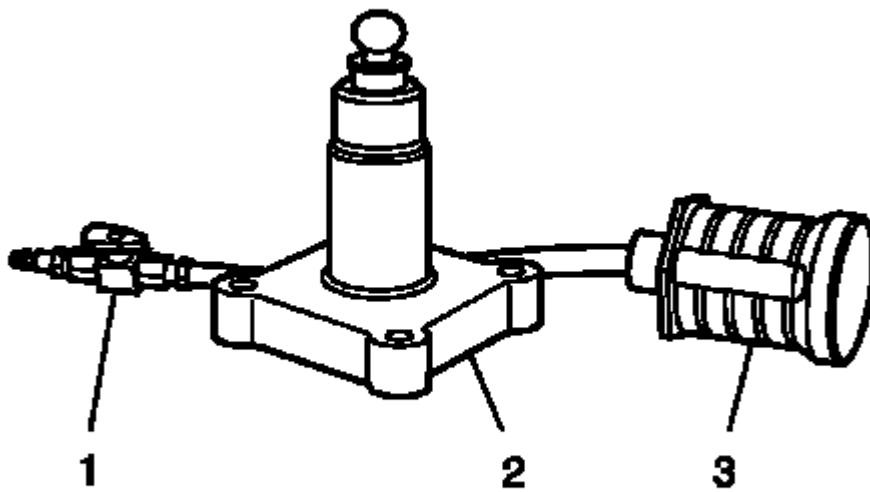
Identifying Cylinder Liner Trimming Tool Components (1 Of 2)
